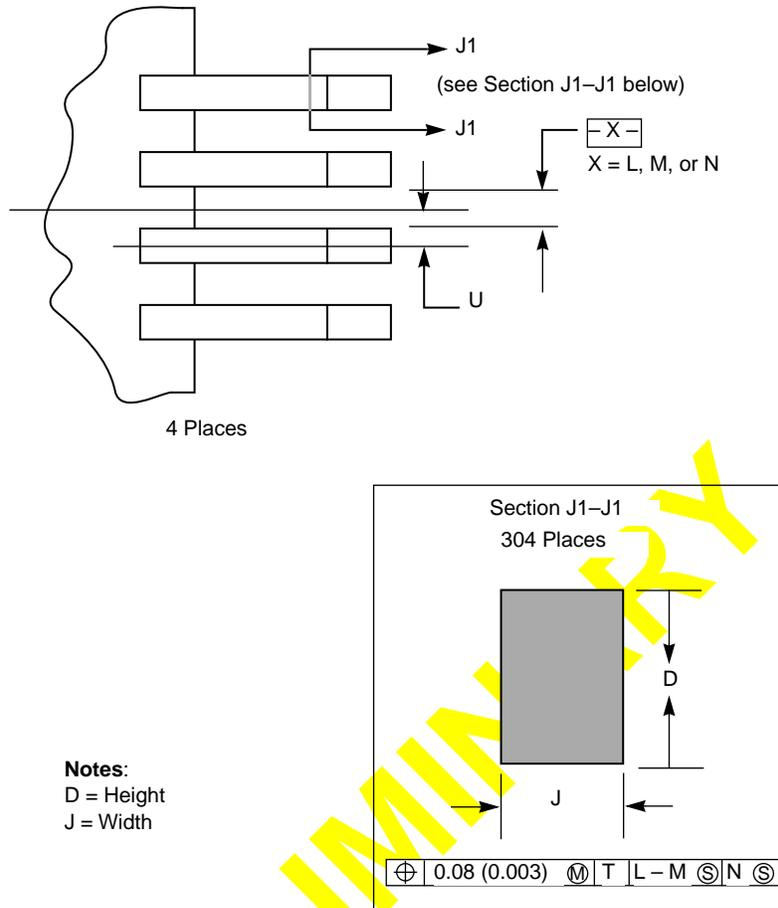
IBM C4-CQFP Mechanical Dimensions—View Y
